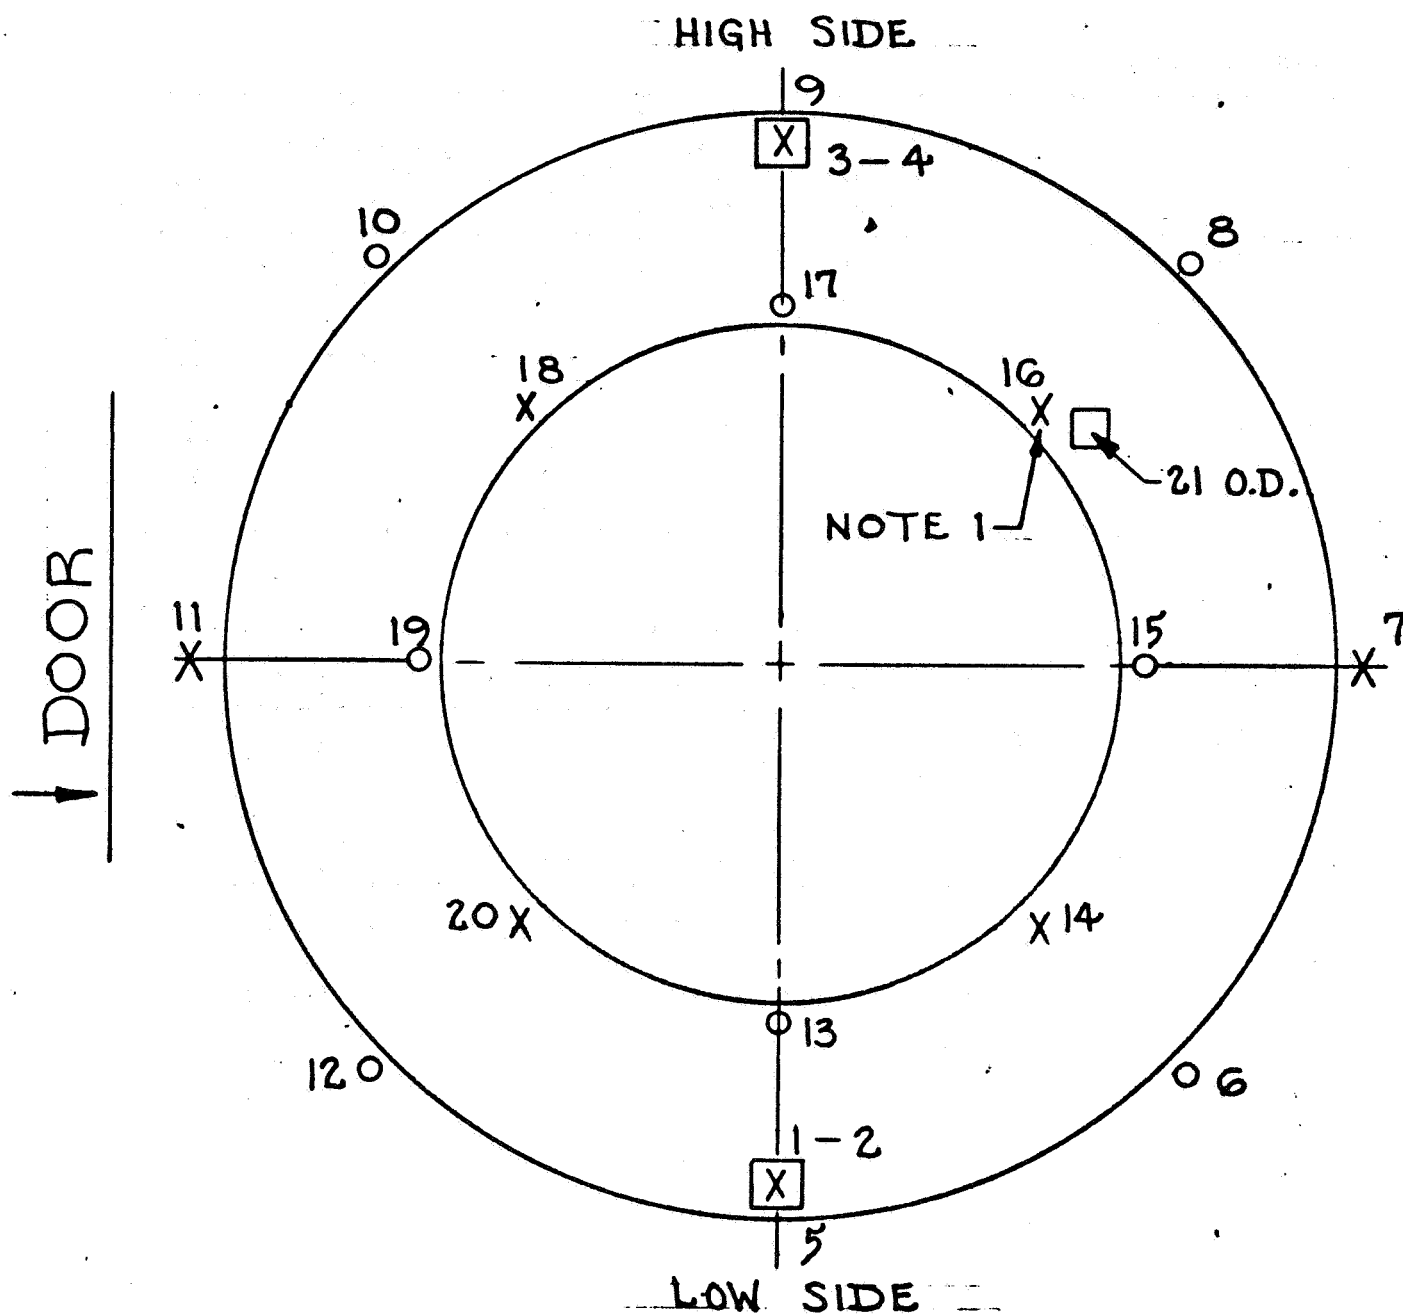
260-SL-1 Adapter Segments and Weld Locations
